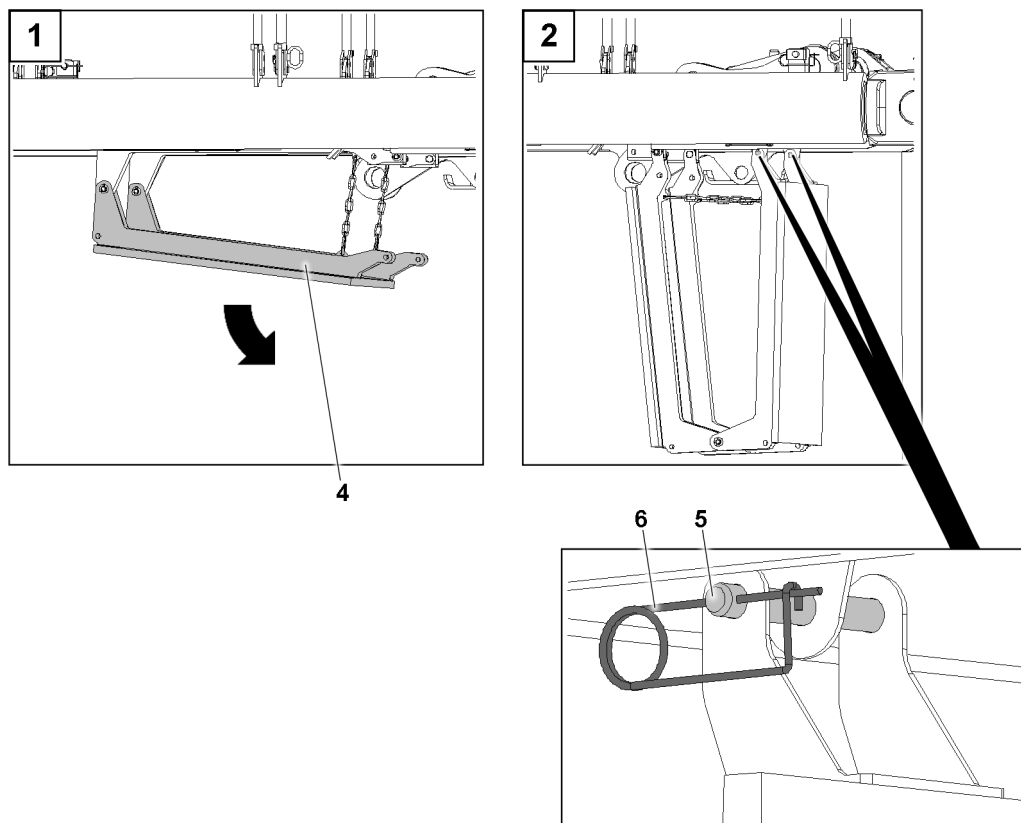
Assembling the assembly pedestal in the transport position — pinning the and securing the platform in transport position
